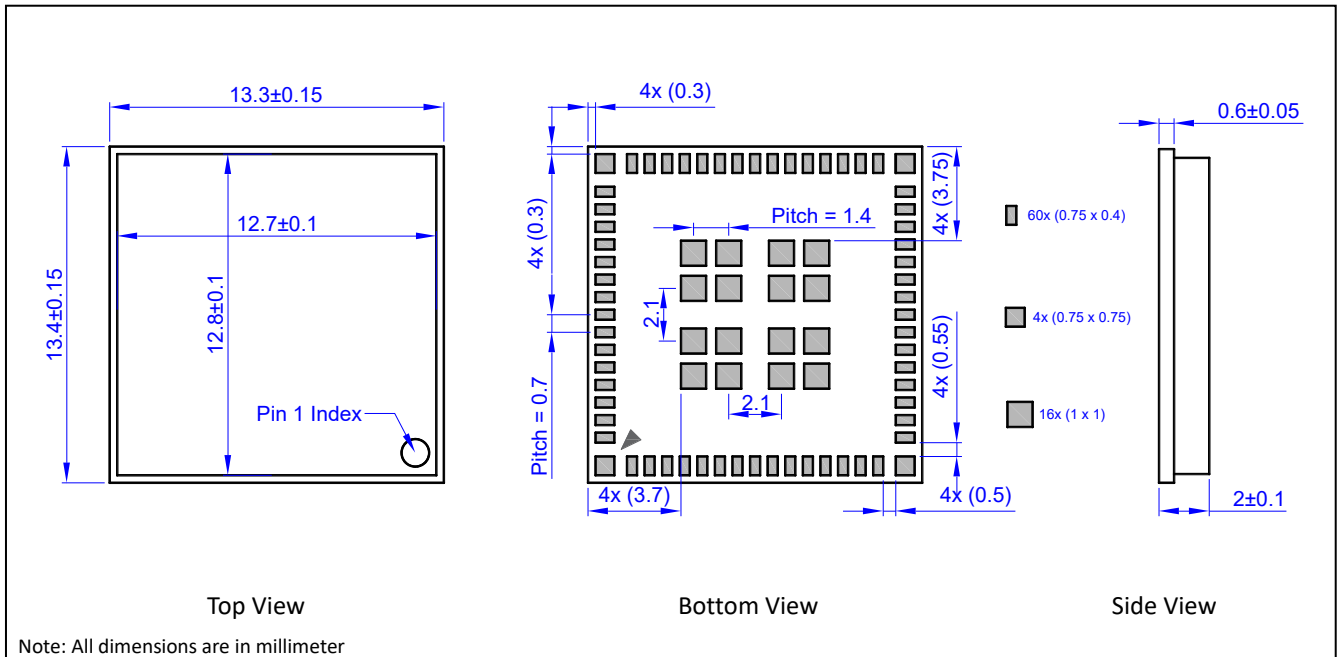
Mechanical Drawing of BDE-BW3300NP2
